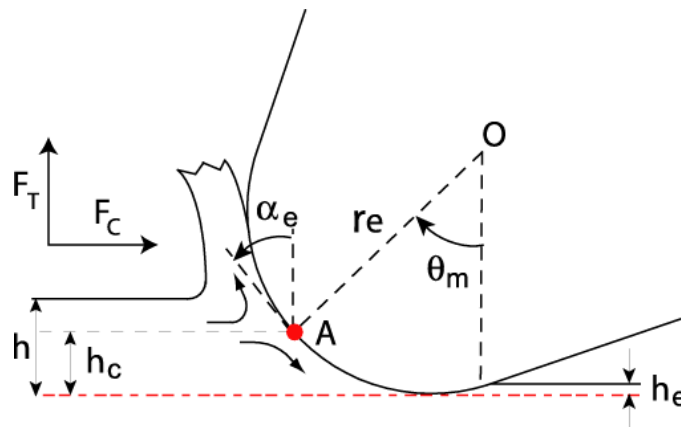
Machining using an edge radius tool [Malekian et al., 2011]
